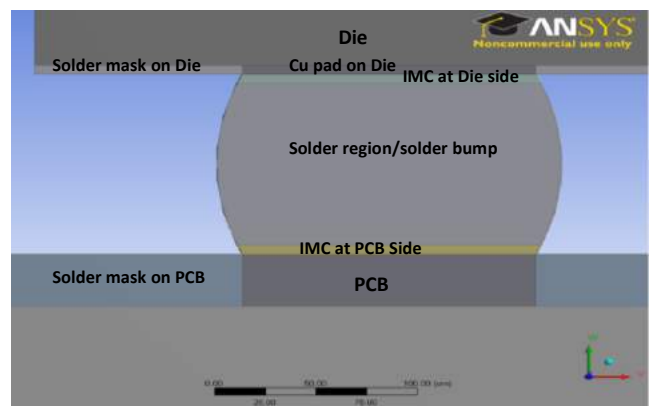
A cross section of an outermost solder bump joint of the flip chip assembly.
